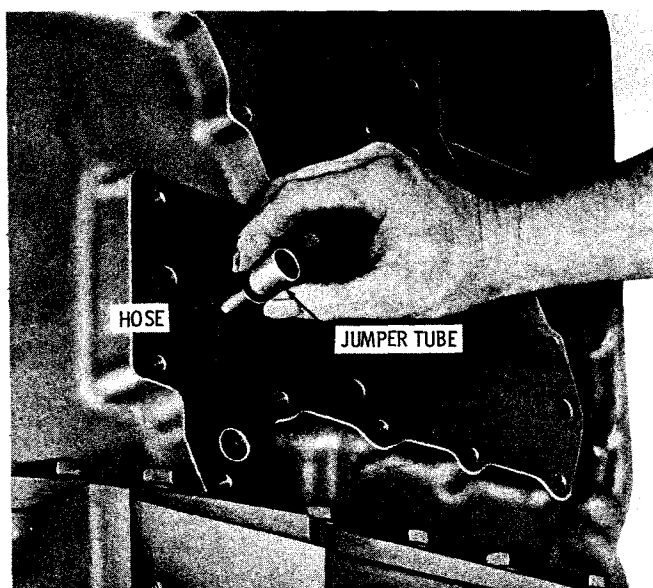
Installing low- and intermediate-range clutch oil jumper tubes S1687
